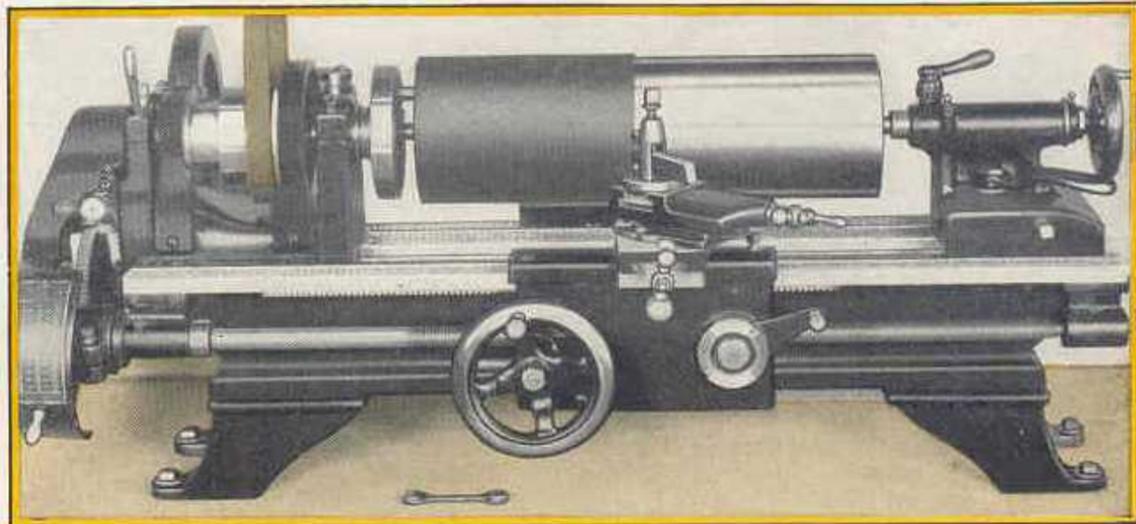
Machining a Steel Roll 6 3/8" Diam. and 18" Long on 9"x3' Jr. Lathe.
